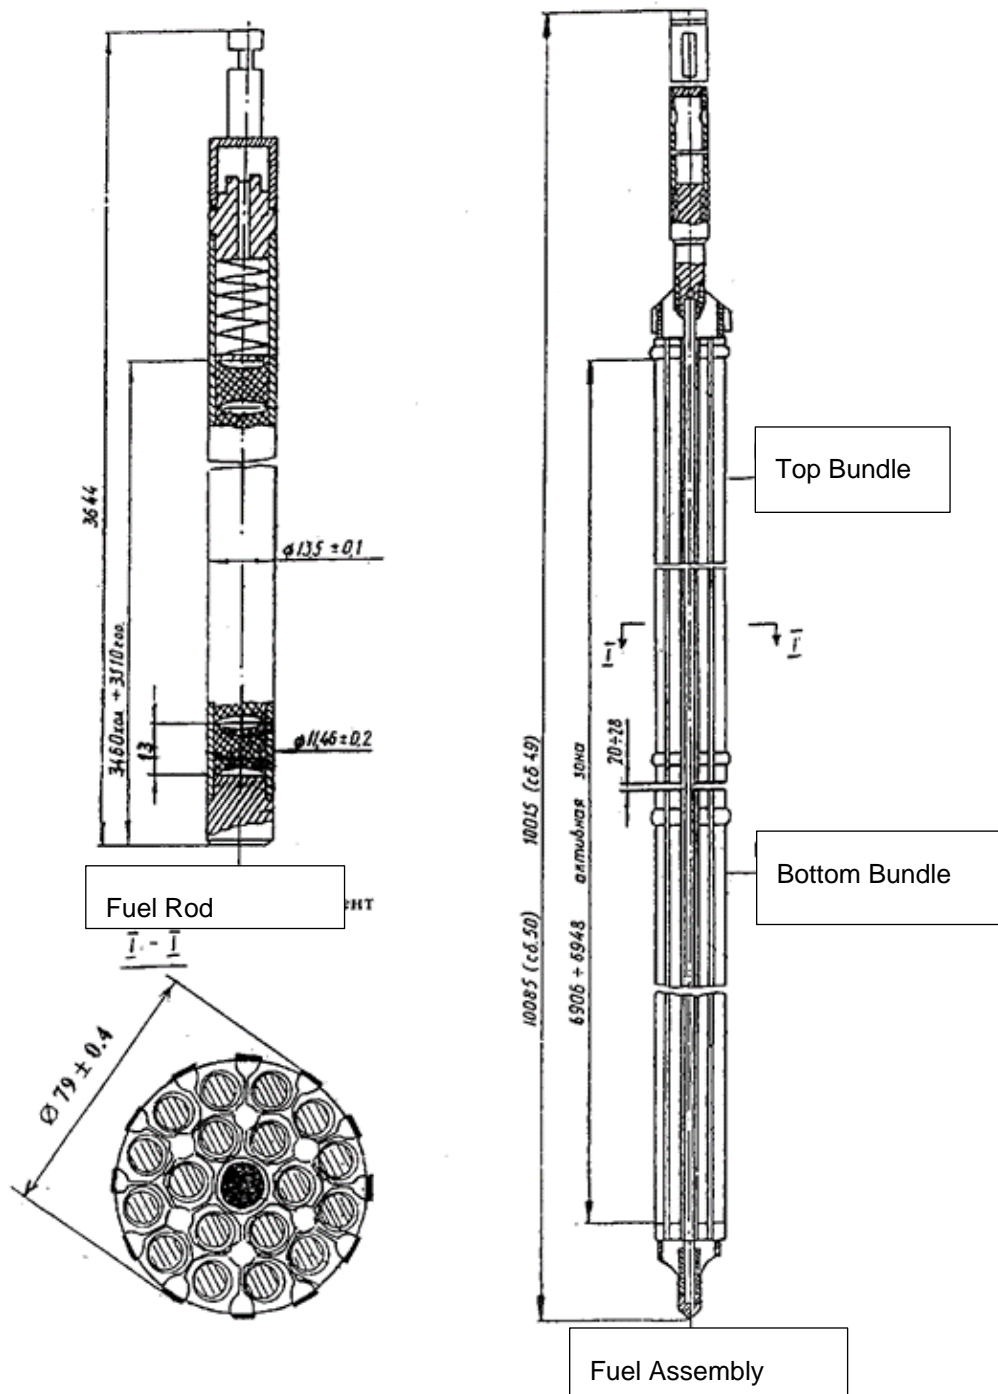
Fuel rod. RBMK-1000 fuel assembly
